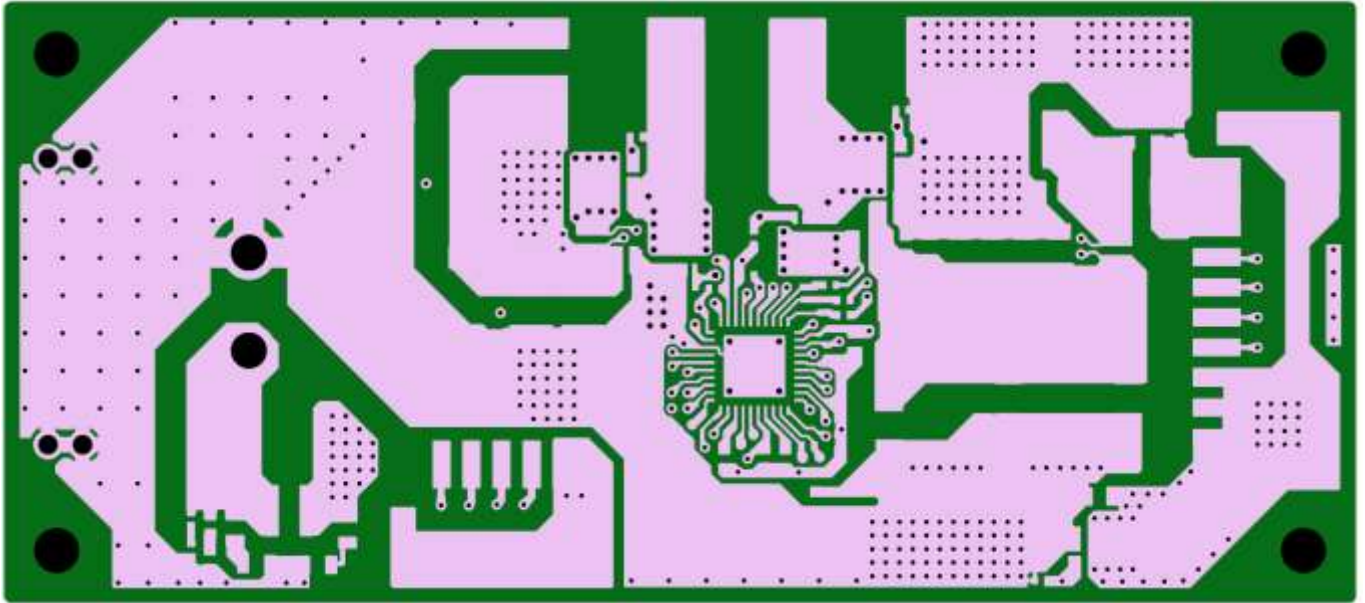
and Fig. 3.2 show the PCB pattern of this power supply.
